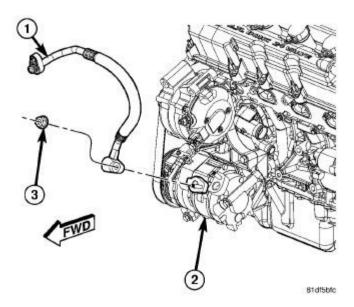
A/C Discharge Line At Compressor Courtesy of CHRYSLER LLC
